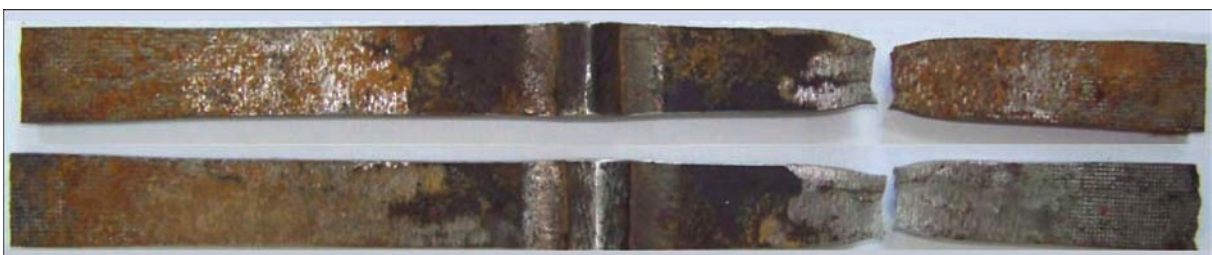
Appearance of welded joint samples after testing for static tension
